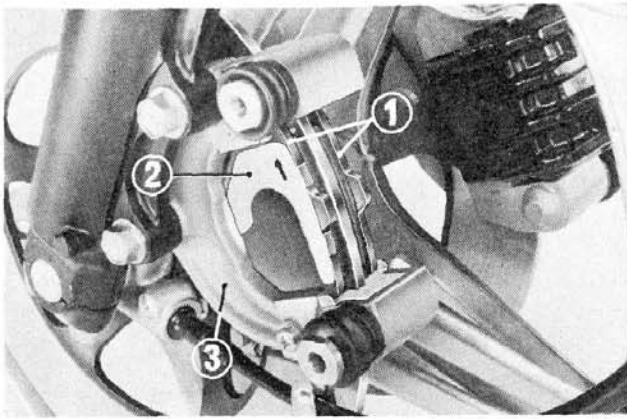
① Brake pad ② Shim ③ Caliper holder
